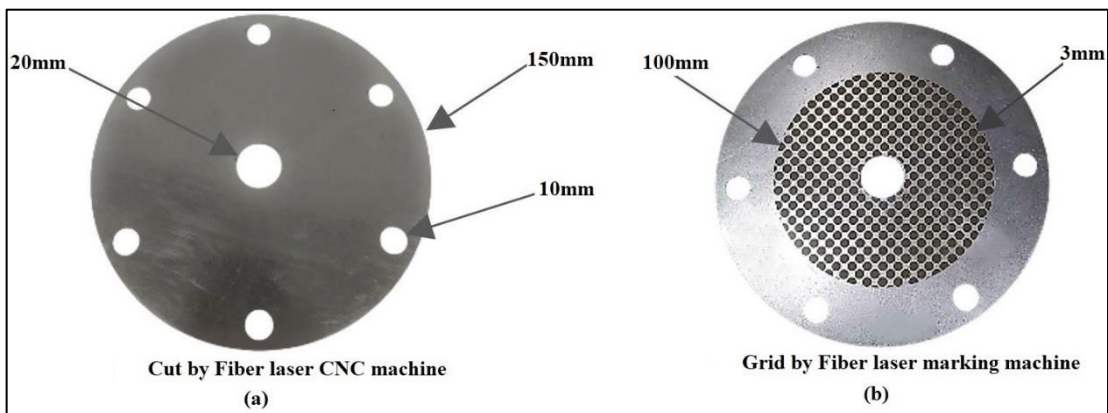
Workpiece Preparation a) Cut specimen, and b) Final gridded specimen
